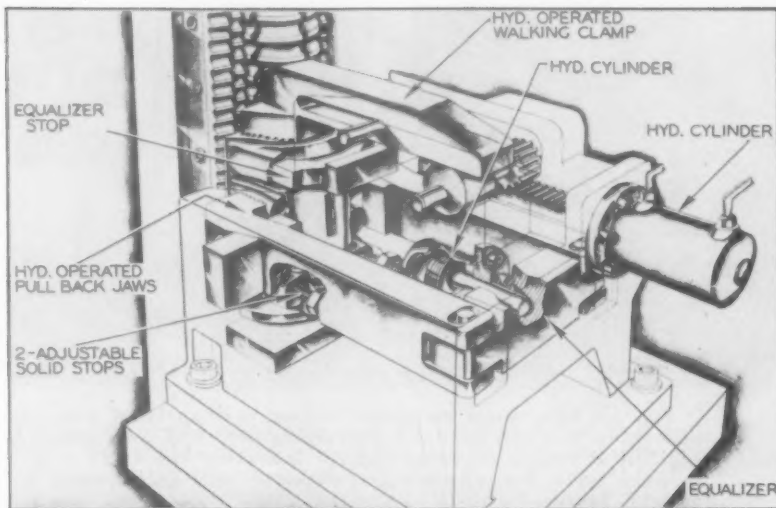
, an automatic shuttle-type fixture for broaching flats on king pins. Magazine-loaded parts are automatically positioned and discharged during the broaching cycle. All drawings, Figs. 9 to 12, are cut away to show construction details.
